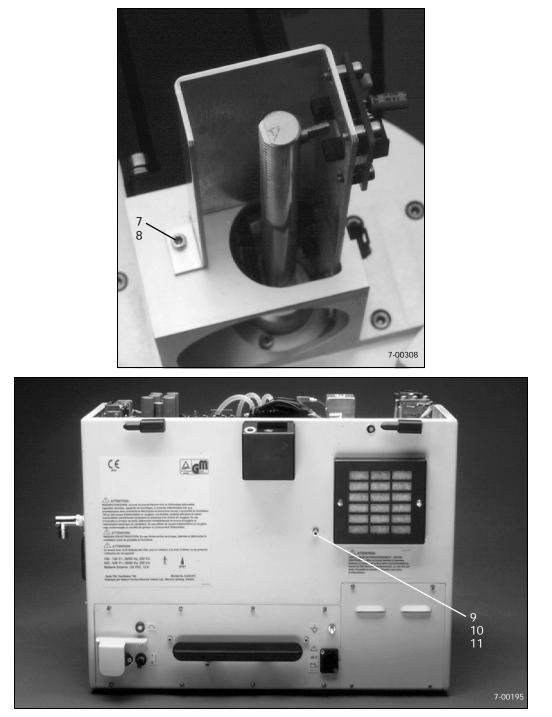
Piston/cylinder and motor/encoder assemblies (Sheet 2 of 2)
